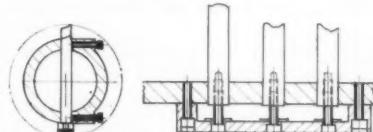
(left).—Small circular pieces of steel welded to the tube give sufficient thickness for the clamping screws. Fig. 3 (right).—A bridge set behind the tools makes a site for the adjusting screws. The washers are attached to the screws after the latter are placed in position
